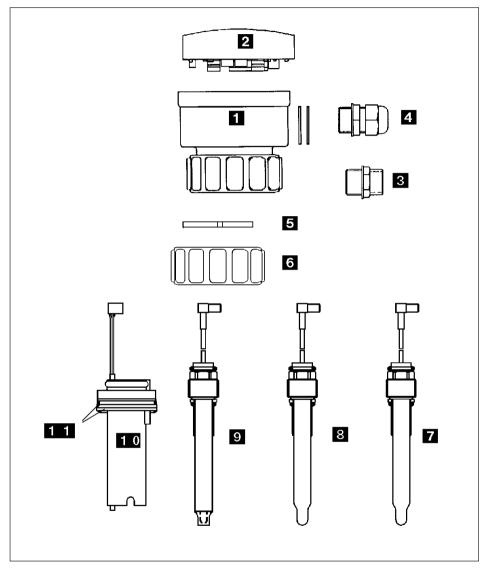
Spare parts explosion drawing pH controller type 8205 compact version
